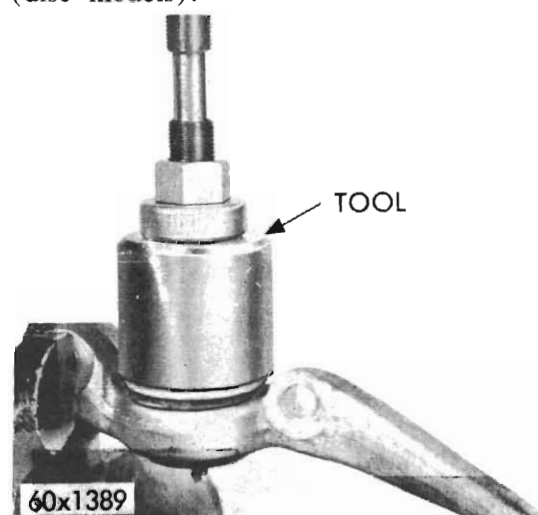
Installing lower ball joint seal using Tool E2C20A
